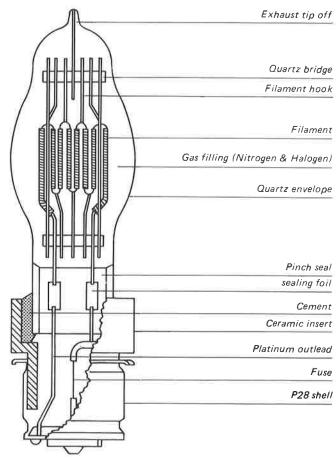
Construction of end section of a typical Quartz Linear Tungsten Halogen Photographic lamp.
